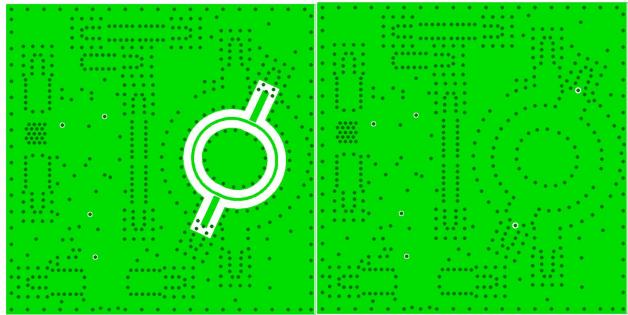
LH Layer 3 board 1; RH Layer 4 board 1
